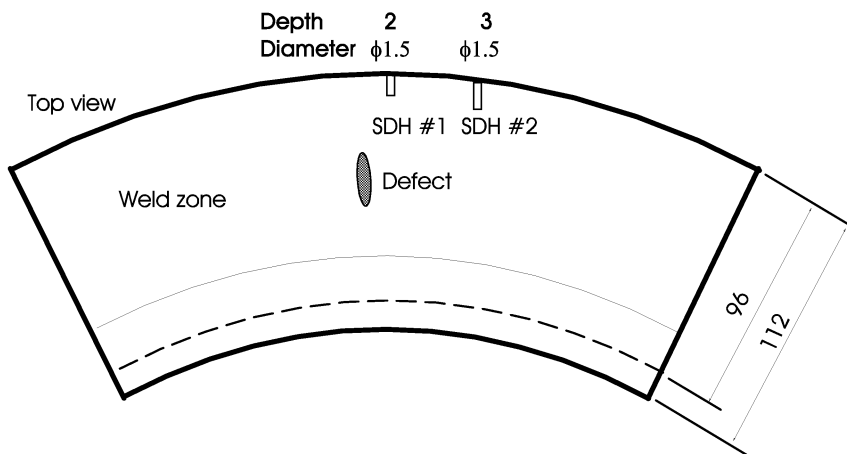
Schematic drawing of weld W123 in copper canister segment BLOCK1.
